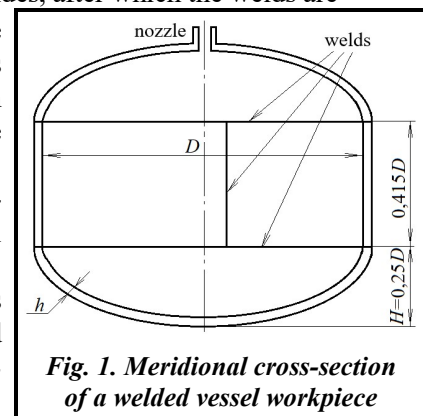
Meridional cross-section of a welded vessel workpiece
